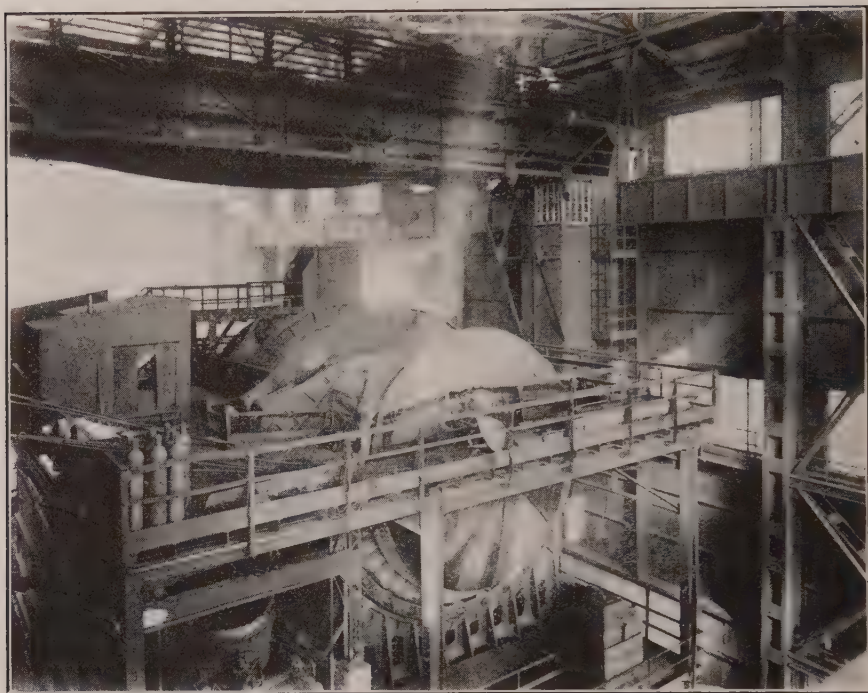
Pouring Pig Iron Into 1300-Ton Mixer
